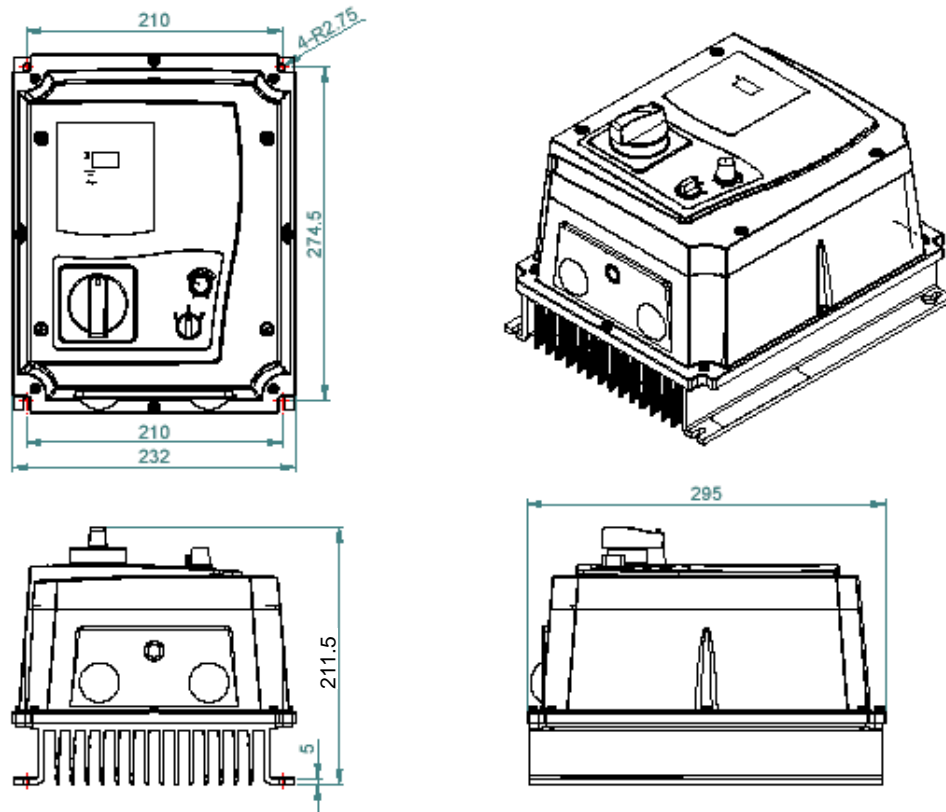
EV drive IP65 (switch) Frame 2 dimensions
